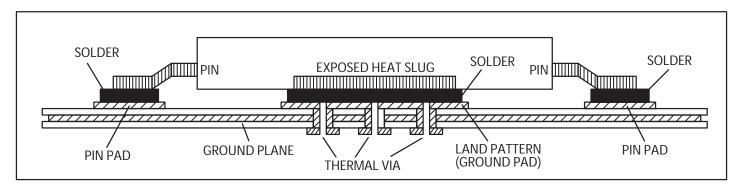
Assembly for Exposed Pad Thermal Release Path - Side View (drawing not to scale)
